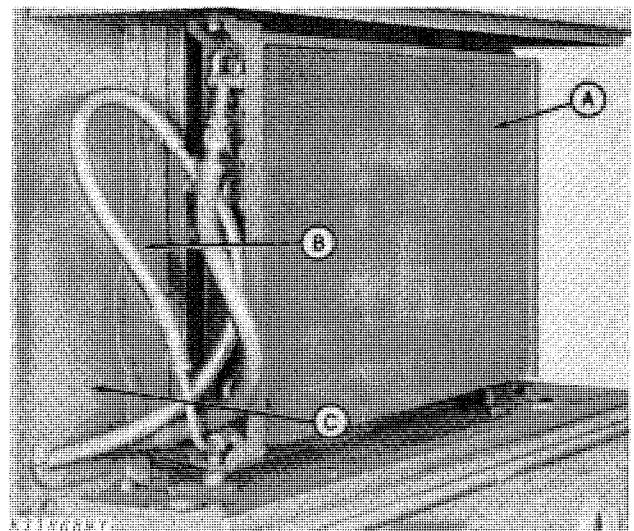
Removing Compressor, Draining Cooling System, and Removing Radiator Hoses
